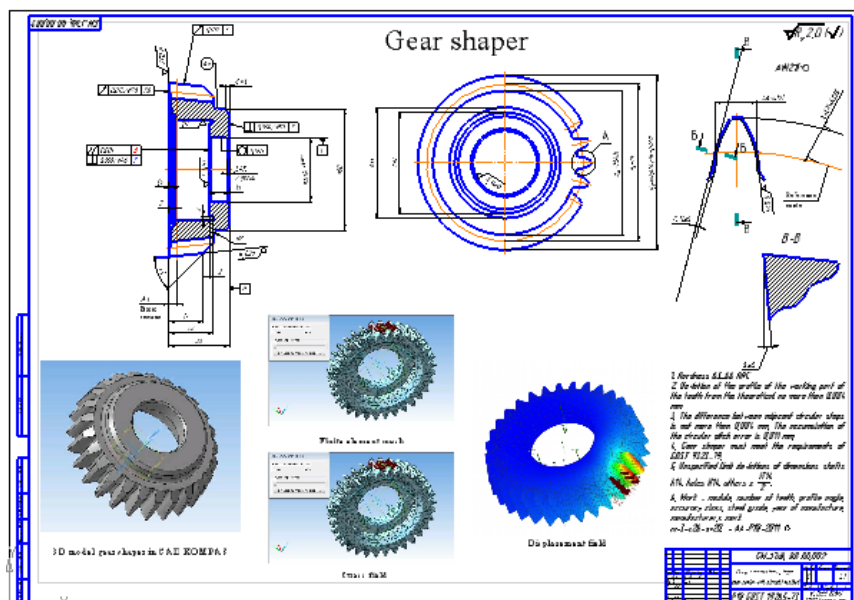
The project of a gear-cutting shaper in a specialized application CAD KOMPAS
